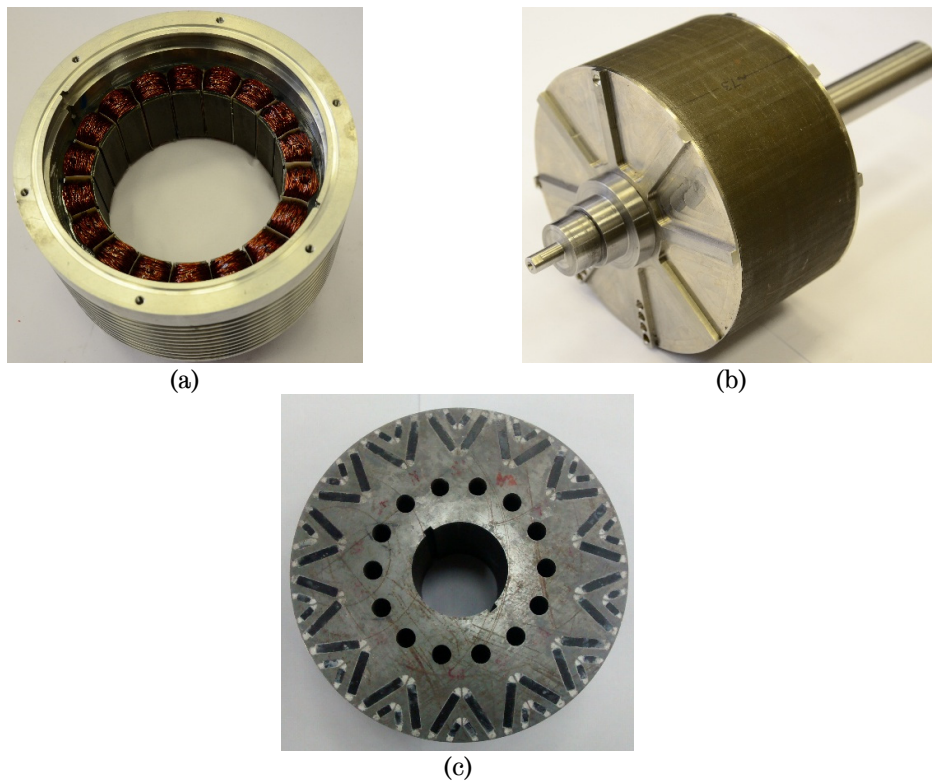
Machine prototype. (a) Stator. (b) Rotor. (c) Rotor lamination and magnets.
